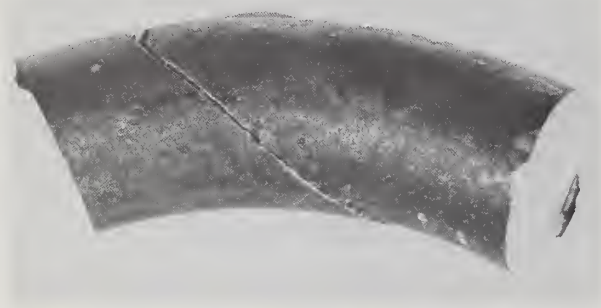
Portion of a helical spring ($\frac{1}{2}$ in diameter rod) in which the fatigue crack had initiated on a 45° plane at a surface pit.
